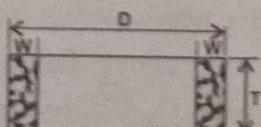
Cylinder or type 2 wheel, whose grinding face is the rim or wall end of the wheel. Has three dimensions: diameter, thickness and wall thickness
